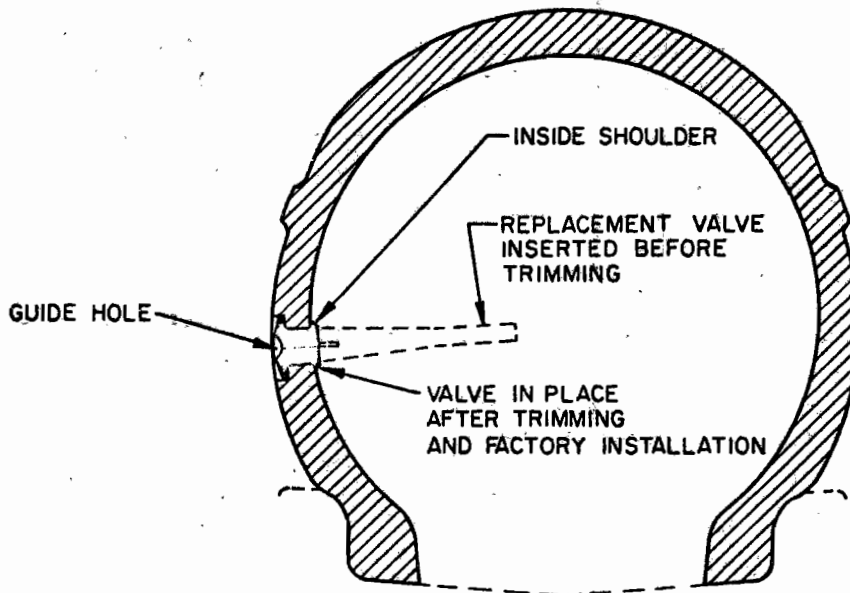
Sidewall Valve Tubeless Tire (Cross-section)
